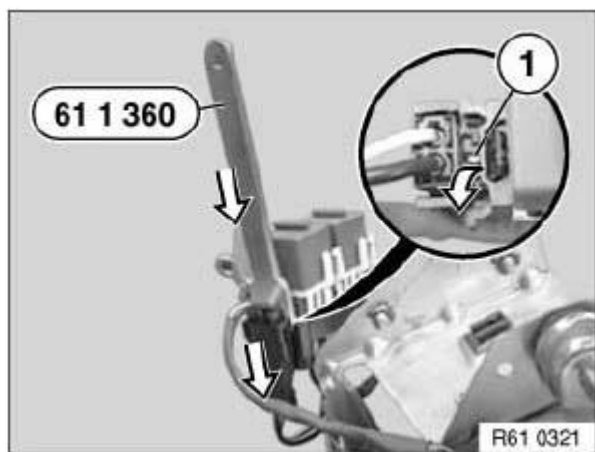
Unlocking Hook Using Special Tool (61 1 360)
